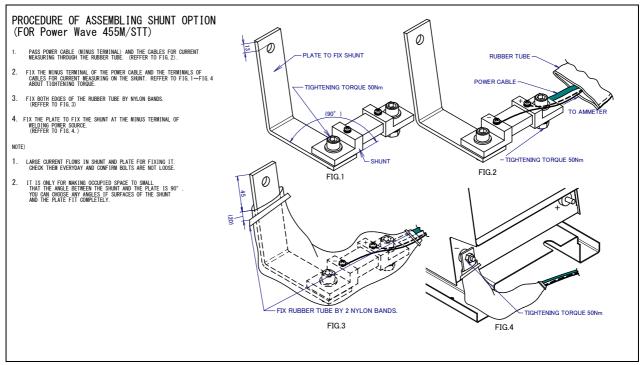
Fig.E (b) Procedure of assembling shunt option (ROBOWELD iC/H2)
